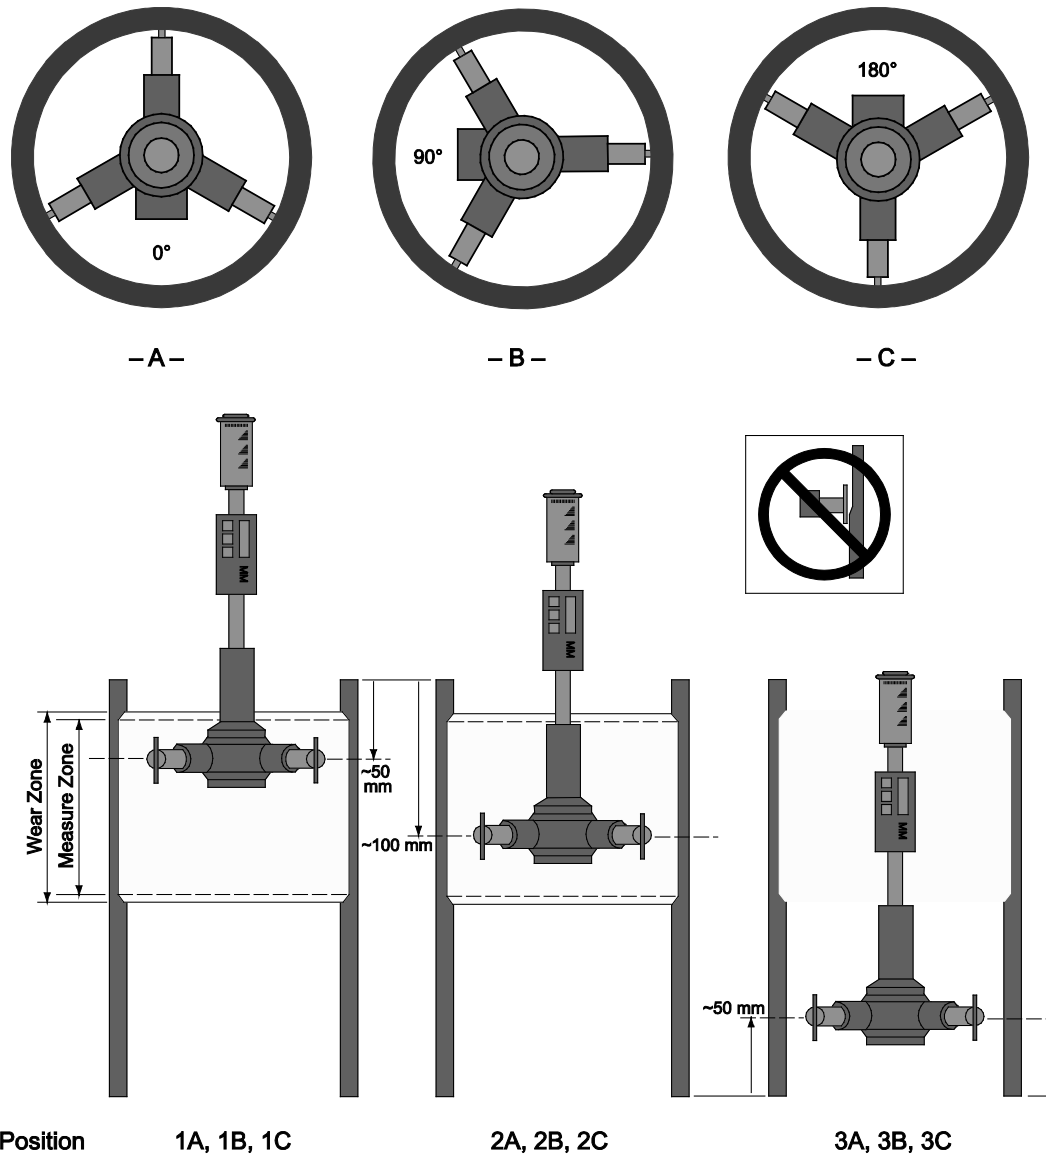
Bore Gauge Measurement Positions within the Mold Bore
